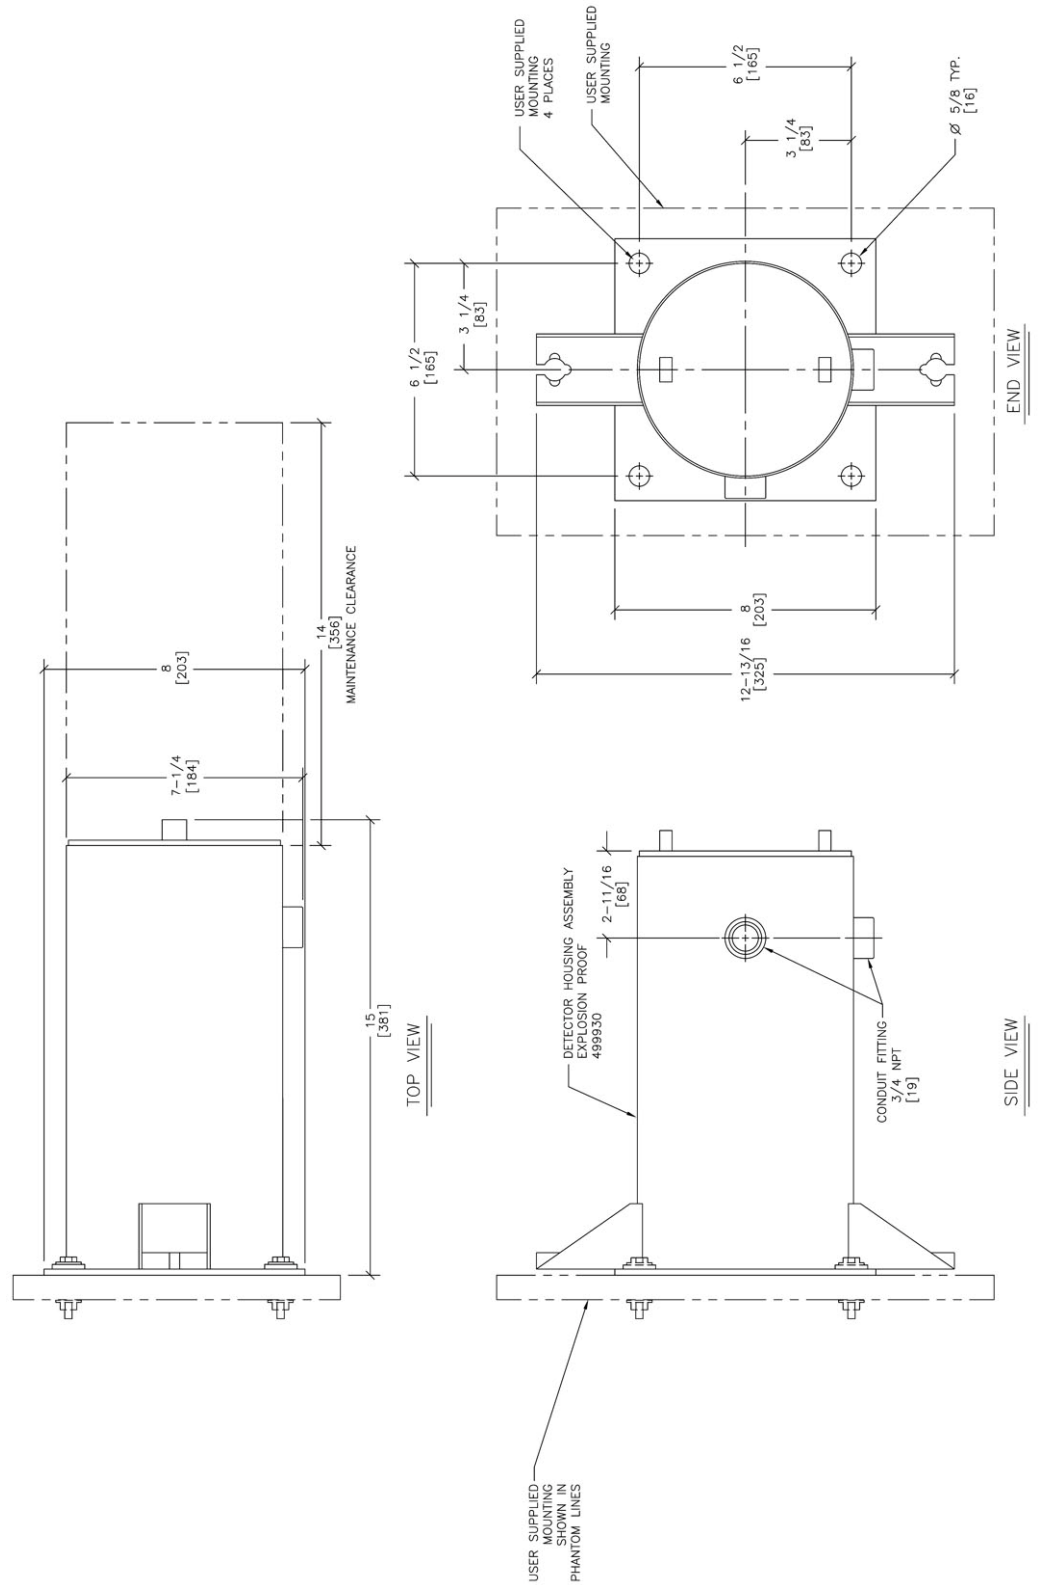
867469: Installation drawing, detector assembly, flat mount, explosion proof housing (sheet 1 of 1)
